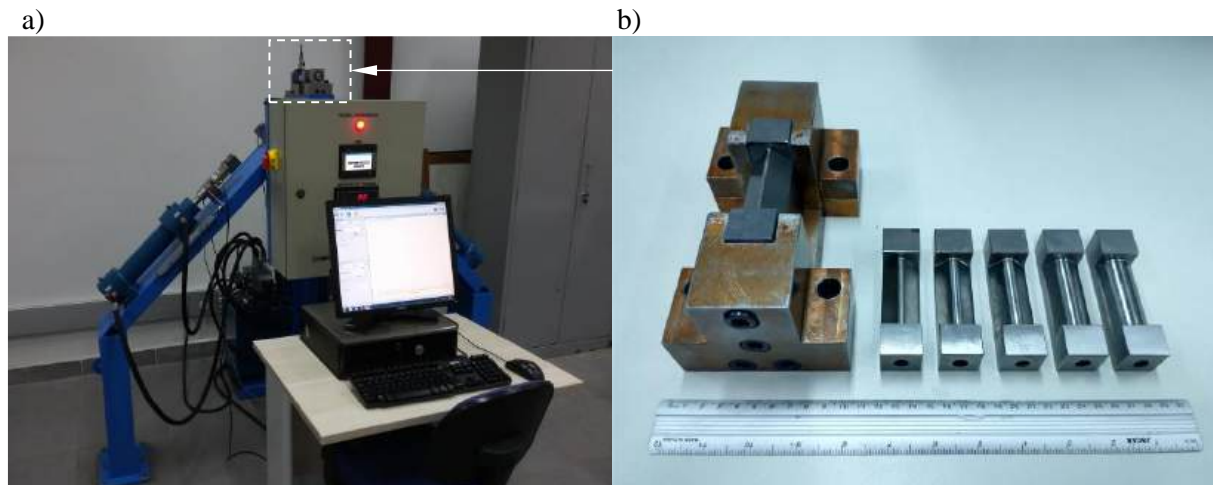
a) the friction simulator and b) the tool holder and the bending pins.
